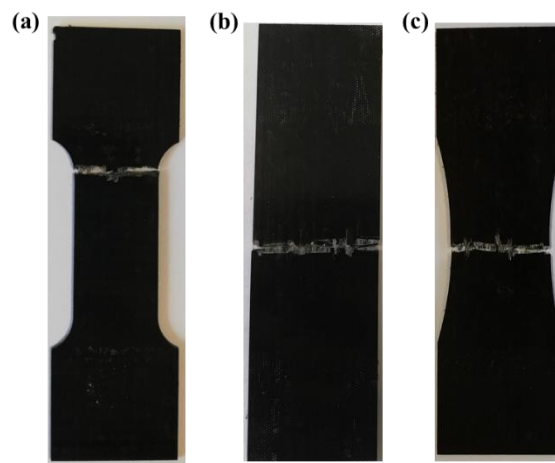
Sample post tensile tests until failure showing the area of the final rupture for: (a) dumbbell geometry, (b) rectangular geometry, and (c) dog bone geometry.
